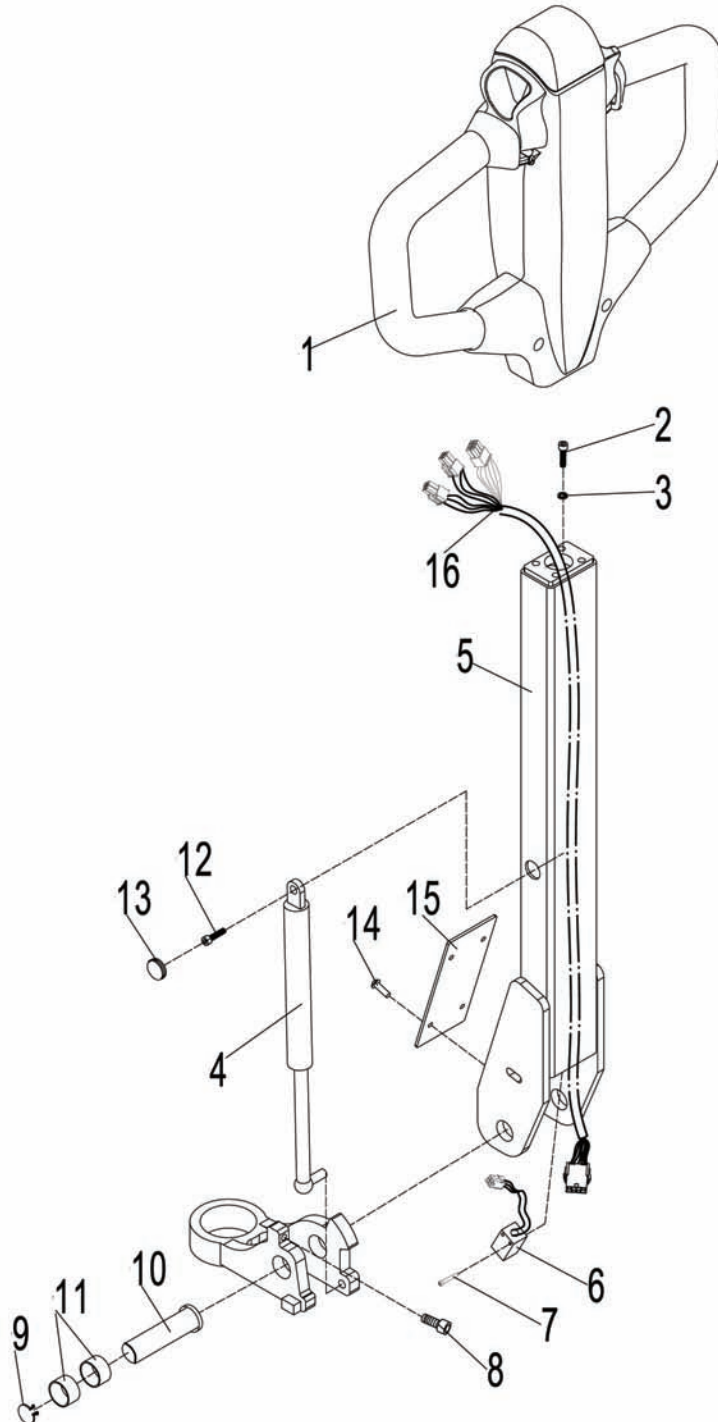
Repair Parts Illustration for Pallet Truck Handle Assembly
